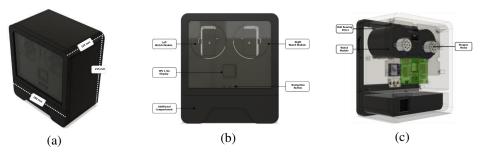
Mechanical design: (a) device dimension, (b) front view, and (c) components position
